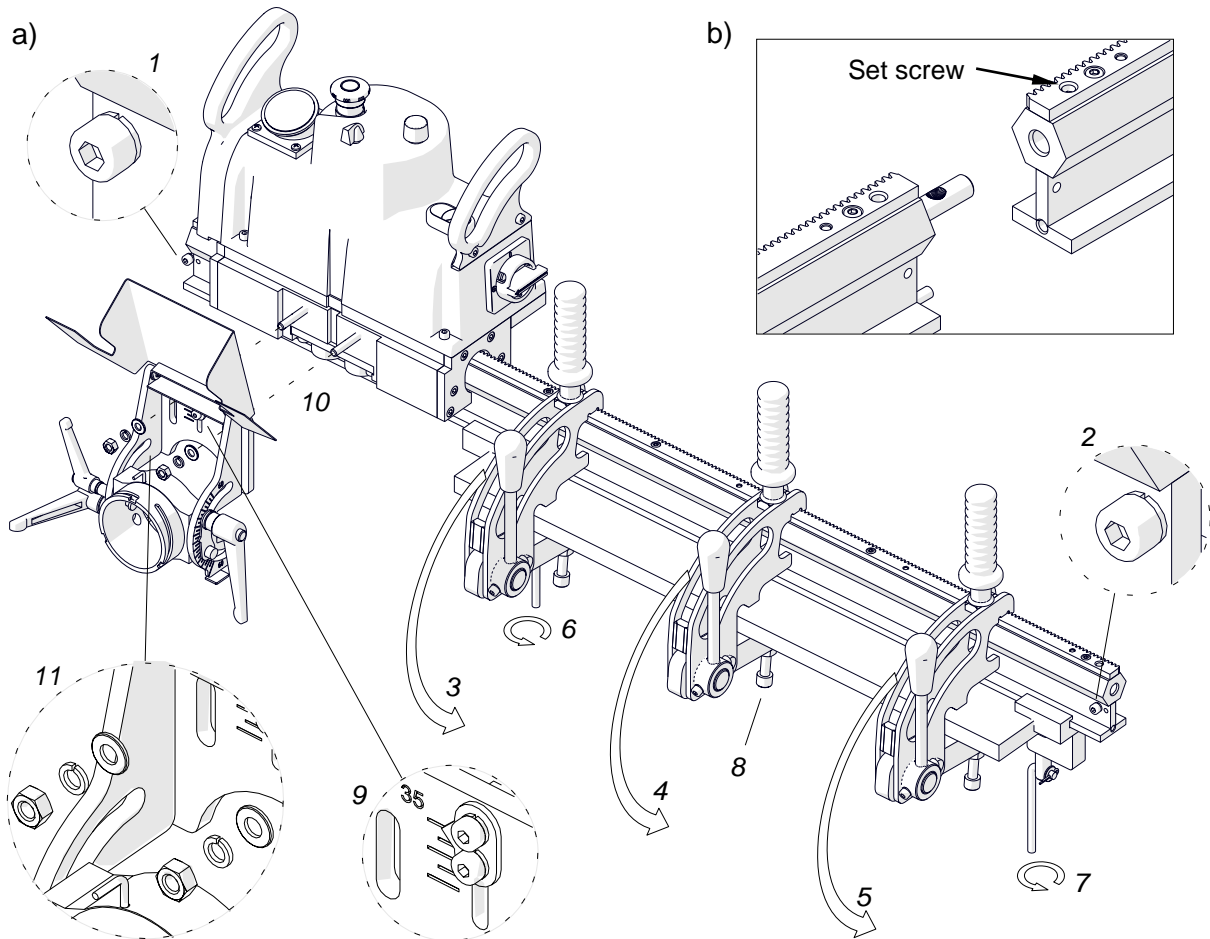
Placing the machine on the plate (a); installing additional guide segments (b)
